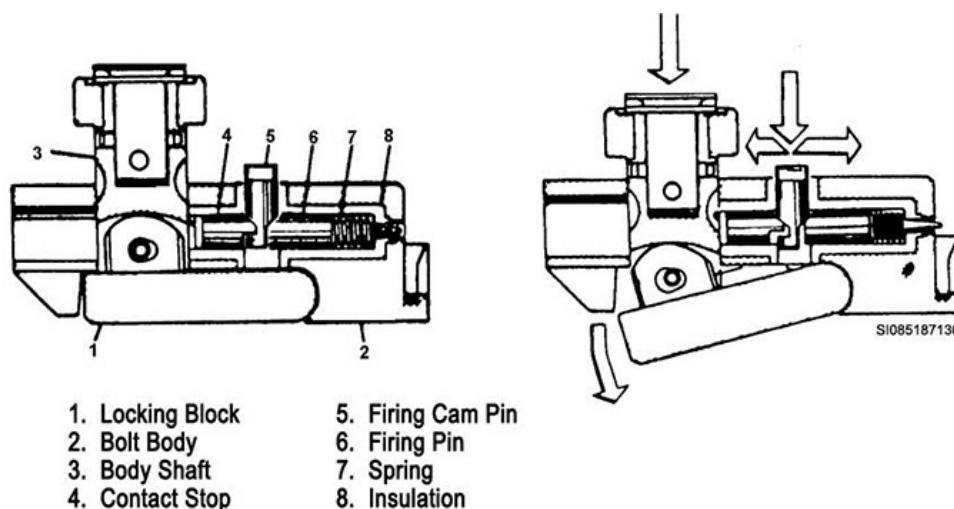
M61A1 breech bolts in unlocked and locked position.
